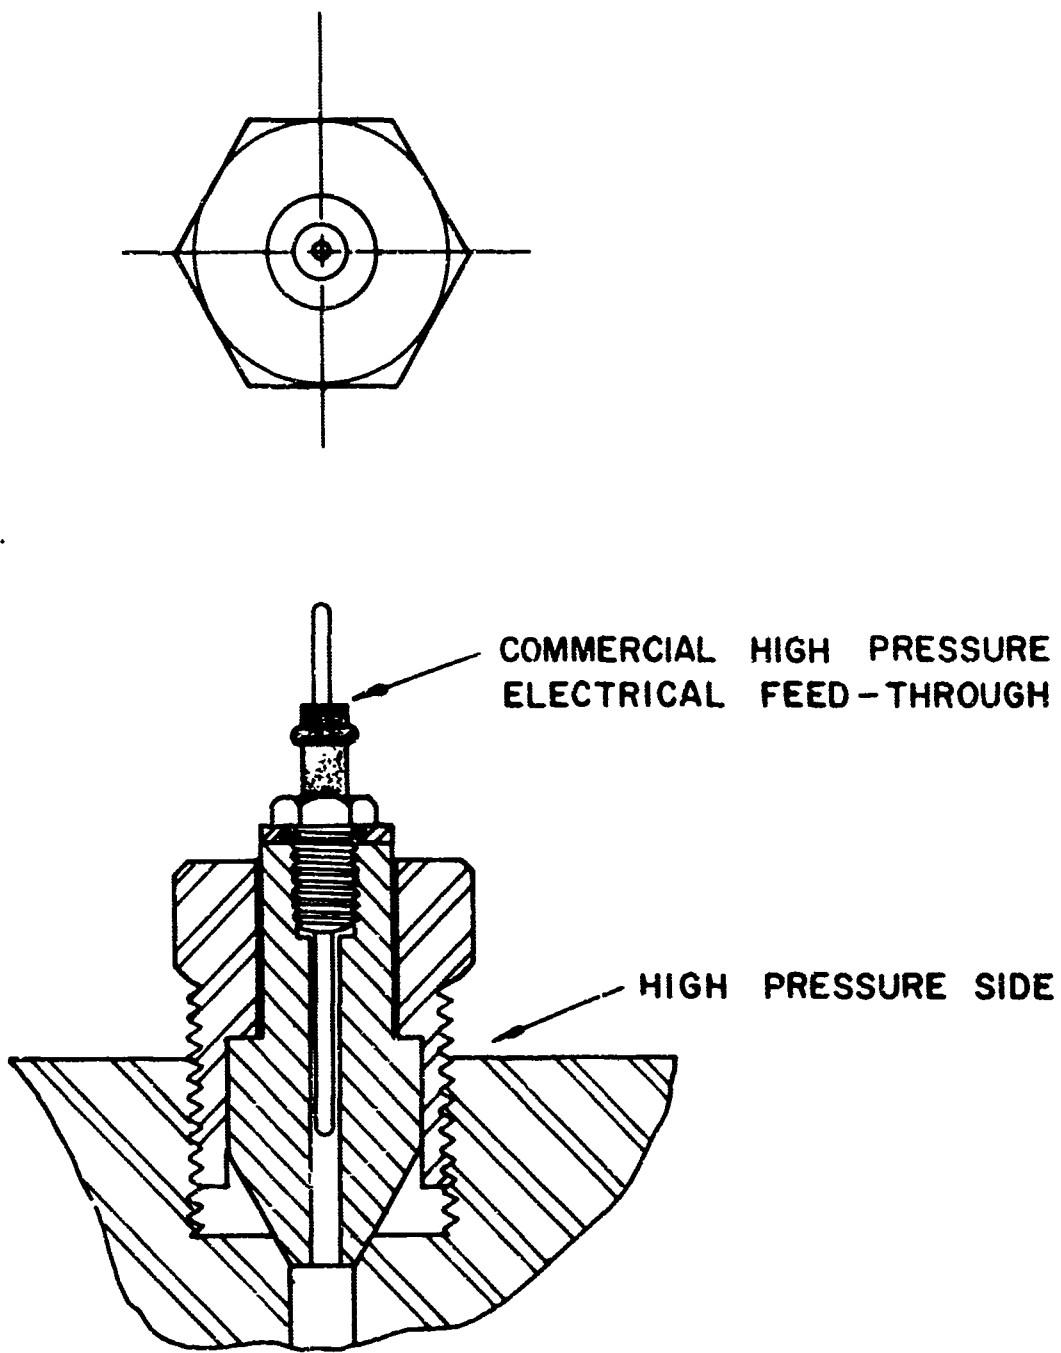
Auxiliary electrical entry fitting fabricated from modified 9/16-inch high pressure plug.
